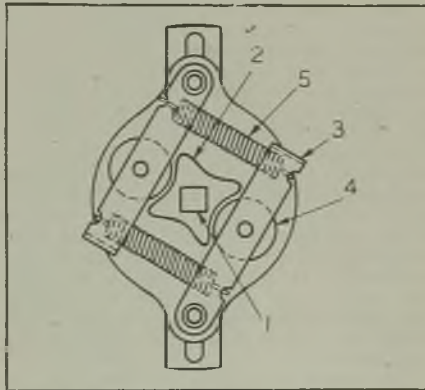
Slow-break rotary-switch mechanism showing (1) centre spindle, (2) star wheel, (3) carriage, (4) rollers and (5) tension springs
